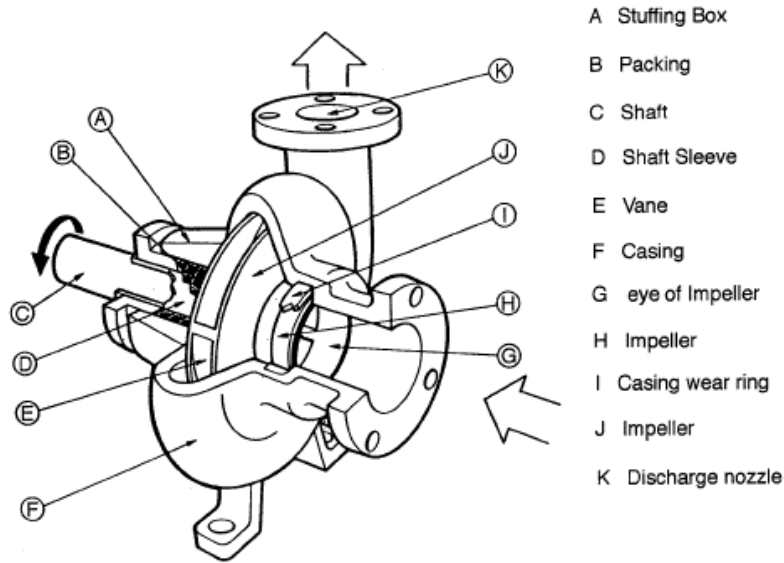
Main components of a closed-impeller centrifugal pump [12]
